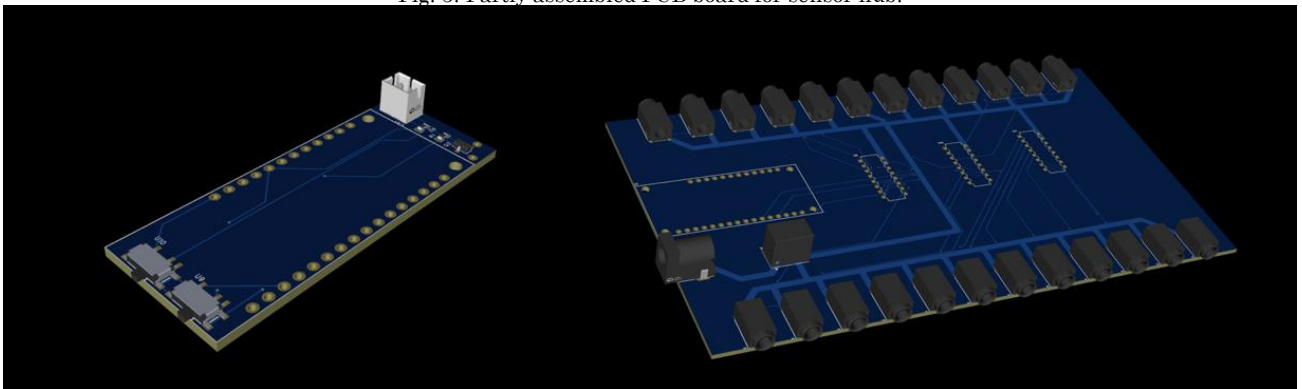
3D renders of the flashlight PCB board and sensor hub PCB board.
